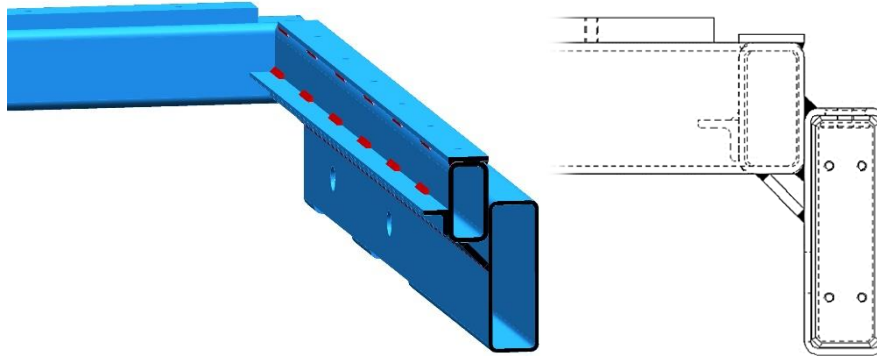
Weldment assembly cut view, with the 6 mm thick support visible underneath. 4 threaded holes are produced on one of the ends of the side profiles, for fixing the LMD table on the rail system, as explained next (right).
